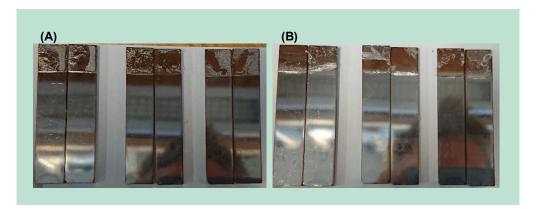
Photos of lap shear samples after lap shear testing. Stainless steel heat pressed with (A) PMMA sheet and (B) PC sheet.
